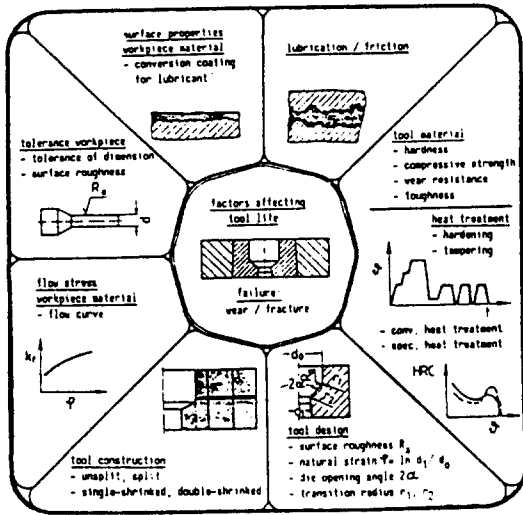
Different aspects of the tool, workpiece and forming process, determining tool life affecting wear and fracture behaviour of the tool
